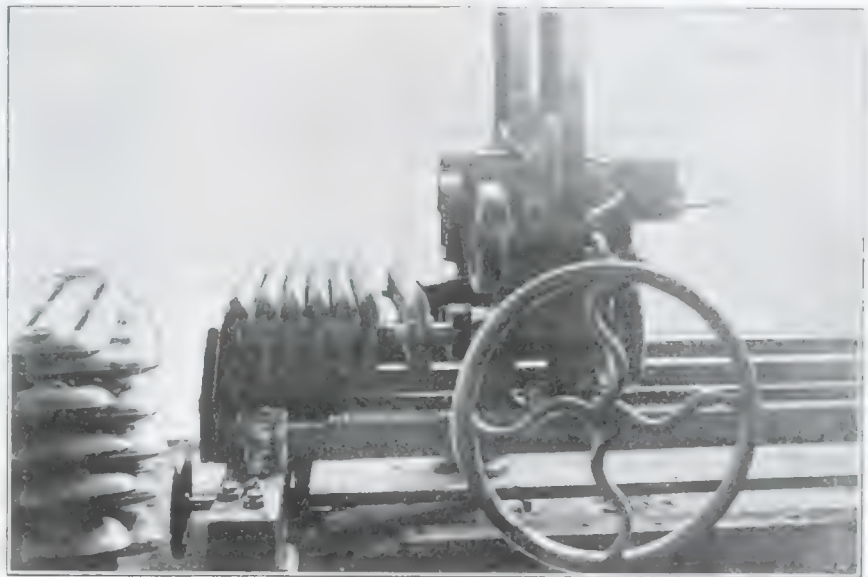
RADIATOR ASSEMBLING MACHINE.
